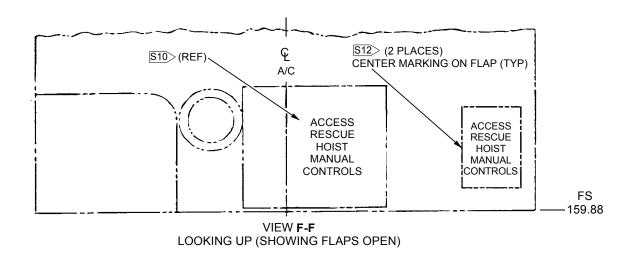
Equipment Markings for External Rescue System (Sheet 2)
